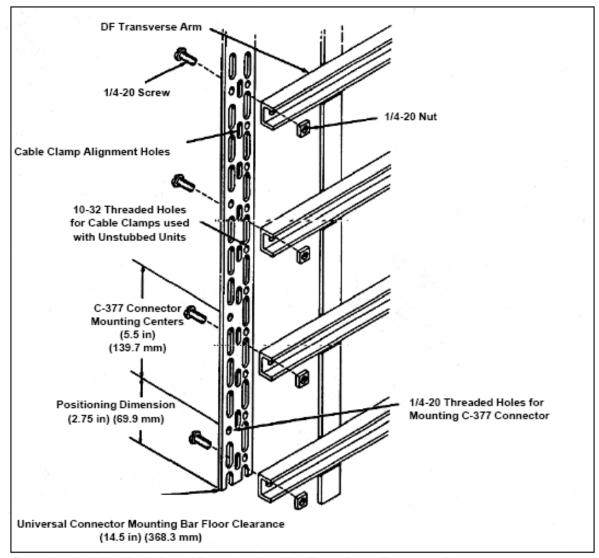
Installing the Universal Connector Mounting Bar on Frame Transverse Arm
